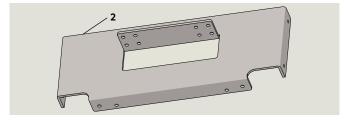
Assembly, drive bracket. Motion Assist 360 drive with speed control
